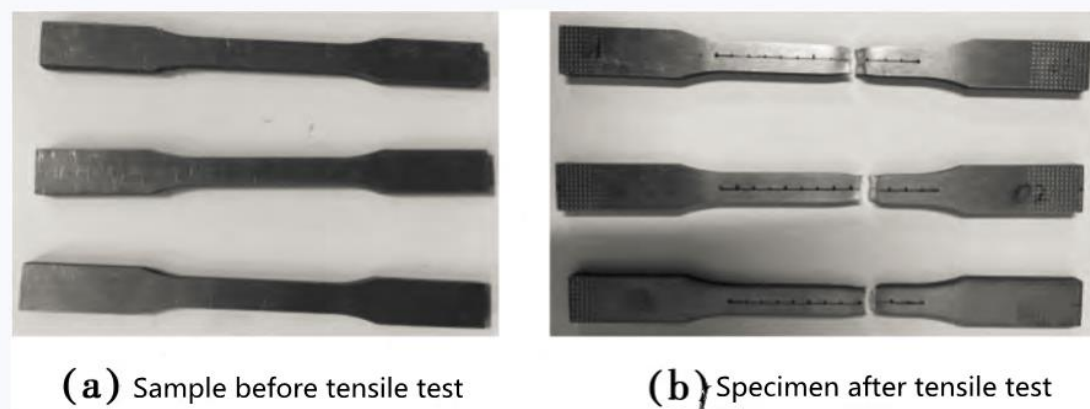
; Rectangular Tensile Specimen of Aluminum Alloy Plate
